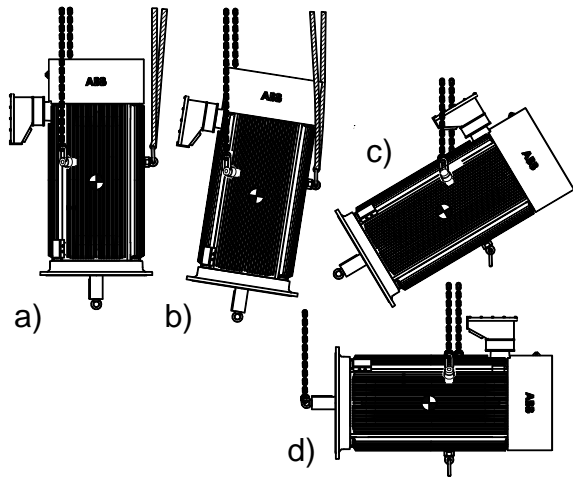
Machine with turnable lifting eyes: lifting and turning.
